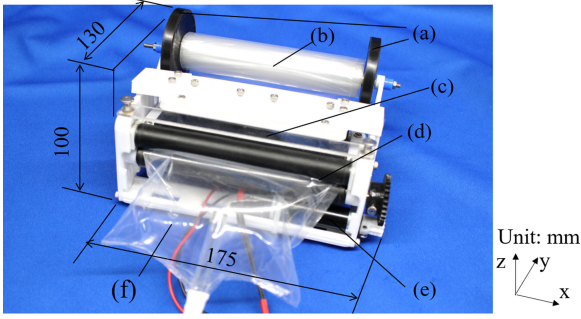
Fabricated tip machine. (a) Rubber sheet attaching side plates. (b) Tube container. (c) Part for making structure by heat welding. (d) Nip part composed of two rollers for cutting-off airflow and feeding the tube. (e) Motor for assisting roller rotation. (f) Tube constituting the robot body.
